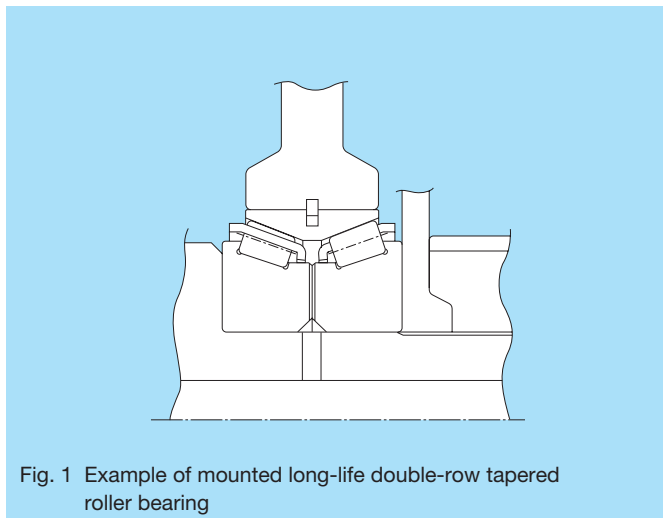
Example of mounted long-life double-row tapered roller bearing
